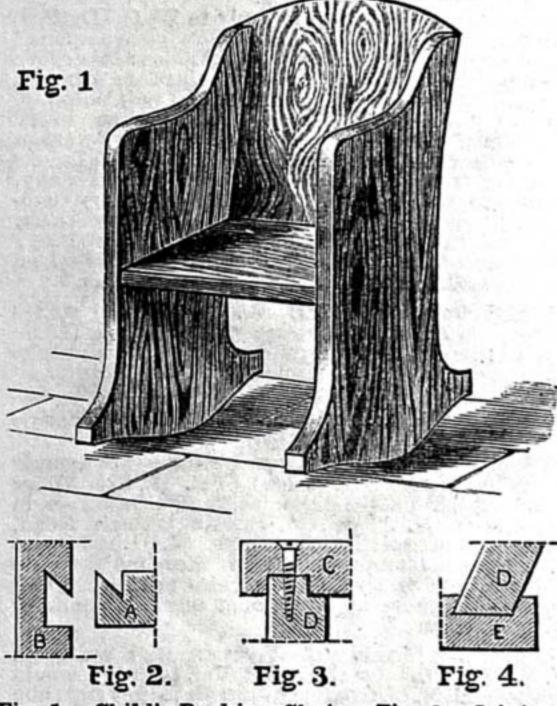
Child's Rocking Chair. Fig. 2.—Joint of Seat A and Sides B: elevation. Fig. 3.—Plan of Joint of Back D to Sides C. Fig. 4.—Elevation of Joint of Back D to Seat E.
